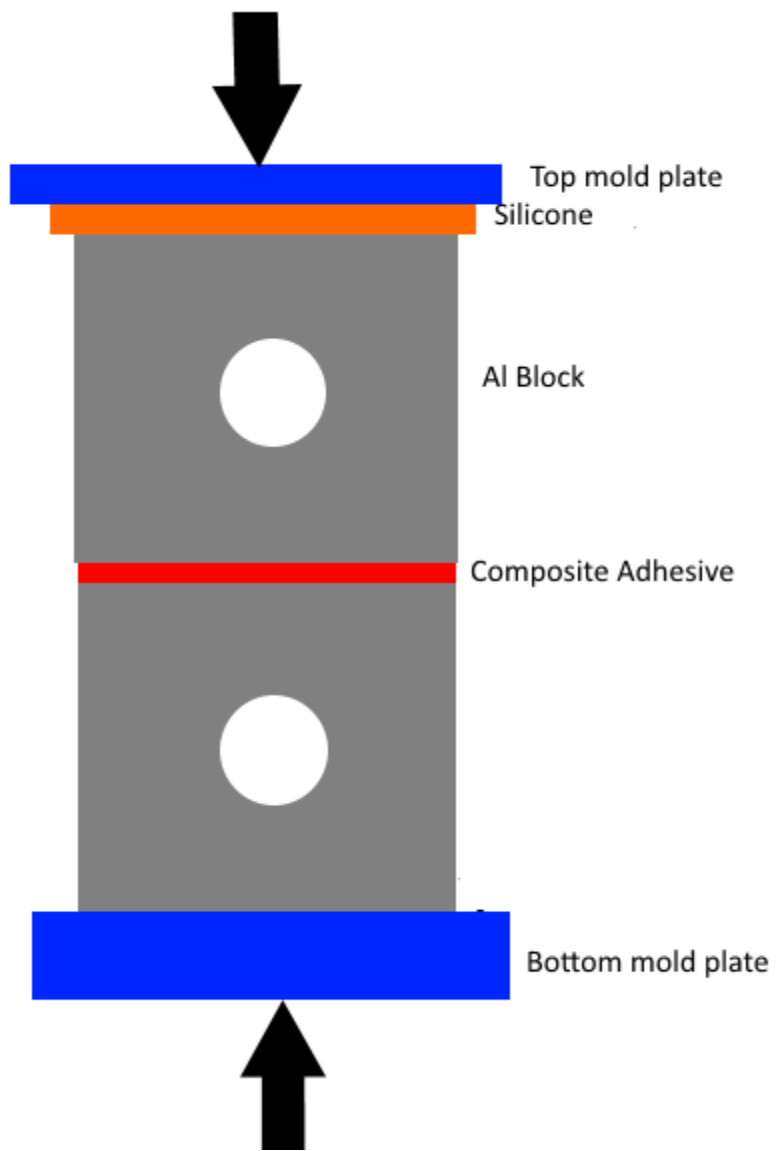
Bonding assembly for single lap shear panel manufactured in the hydraulic press
